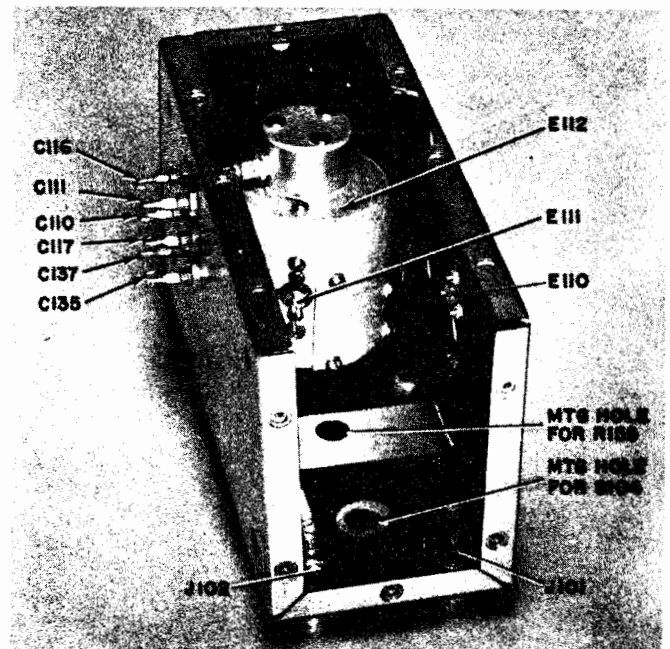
Interior View of Buffer-Amplifier with Tube Shelf and CARRIER RANGE Switch (S-104) Removed
